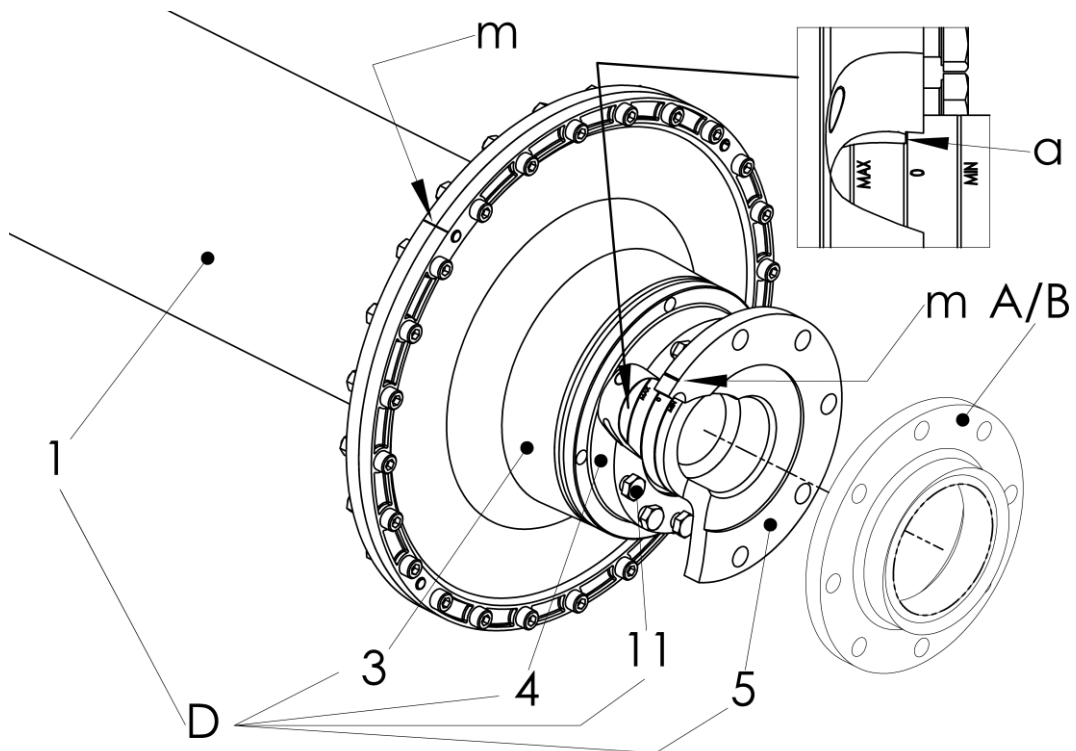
Mounting the pre-mounted supplied coupling to flange (A/B)
